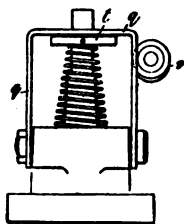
Modified Form of Roots' Governor for Petroleum or Explosive Engines (End View).
